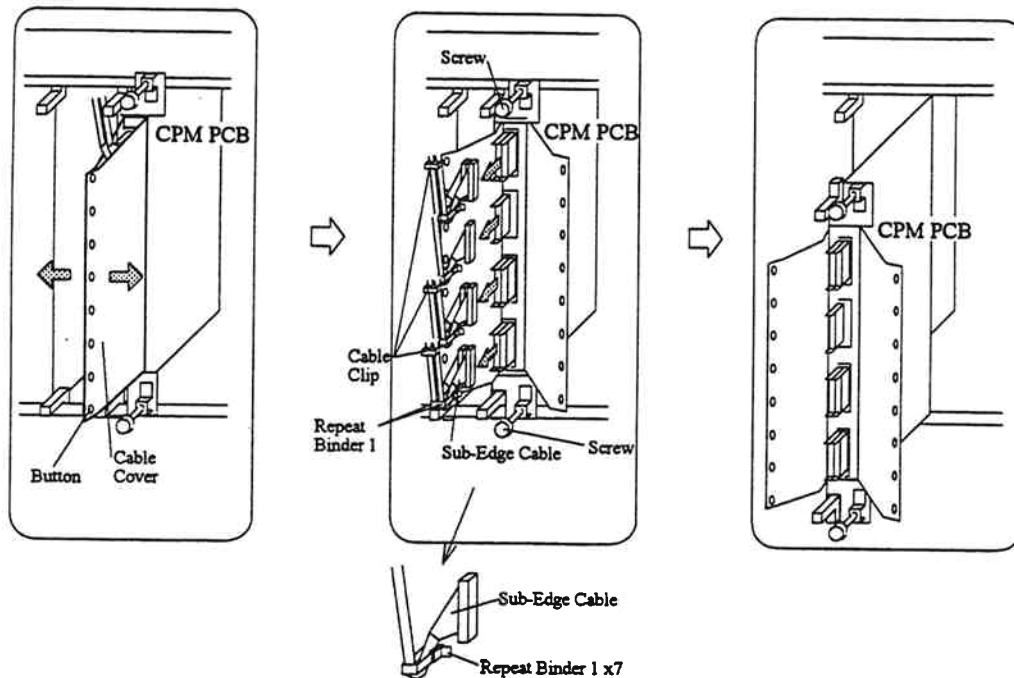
Removal of the CPM PCB
